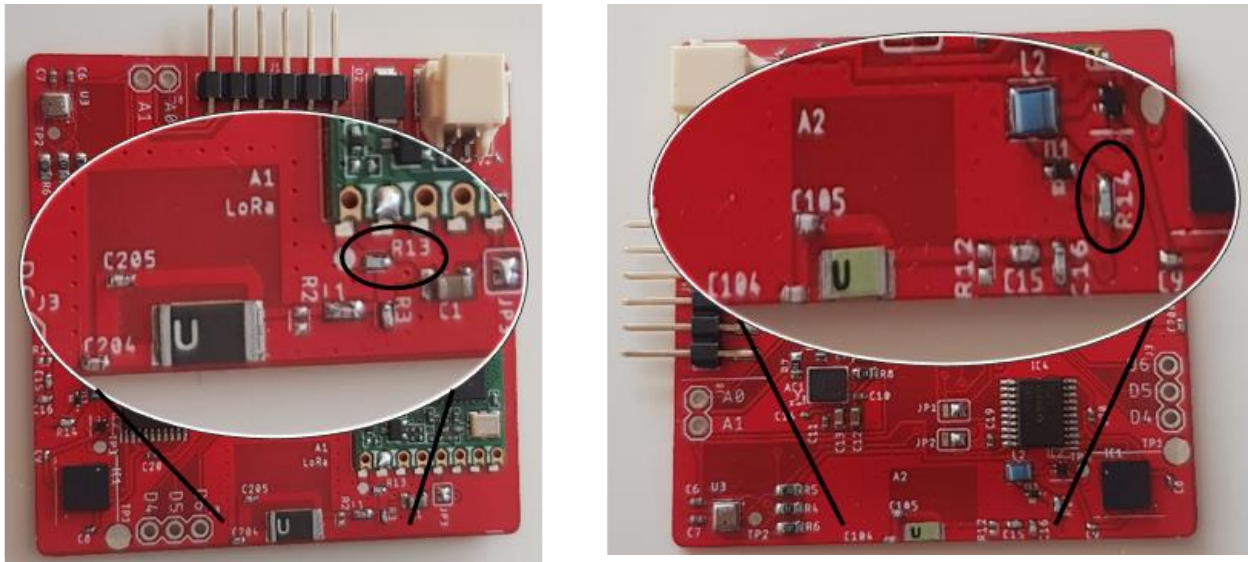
RF front end. Left side: Transmitter section. Right side: Receiver section.
